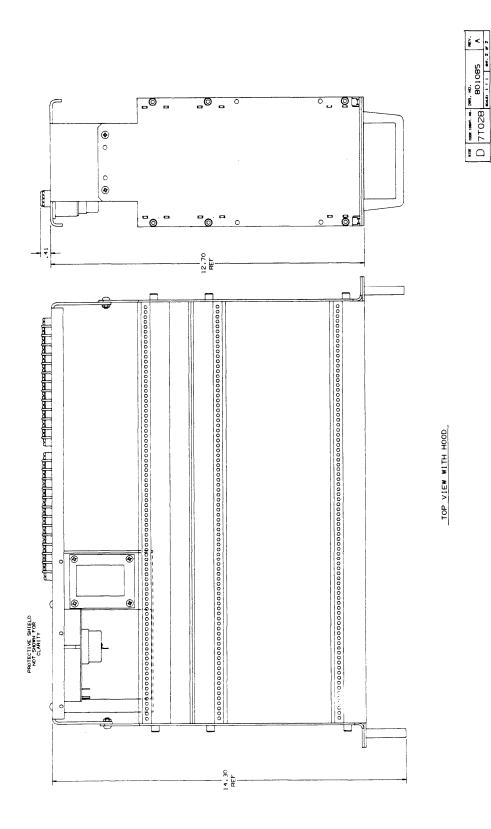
Full 19" Subrack Top View Outline Drawing
